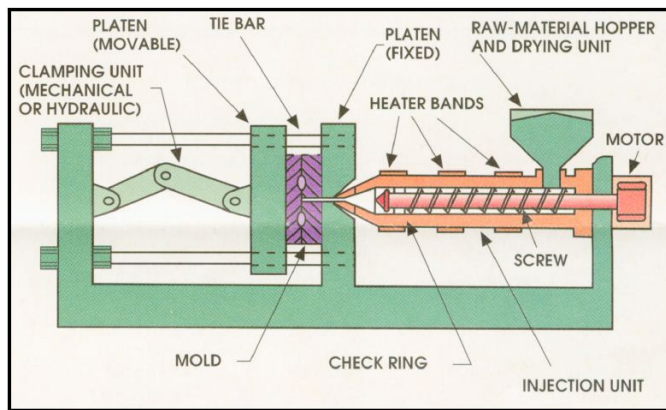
Schematic of an injection molding machine<sup>16</sup>
